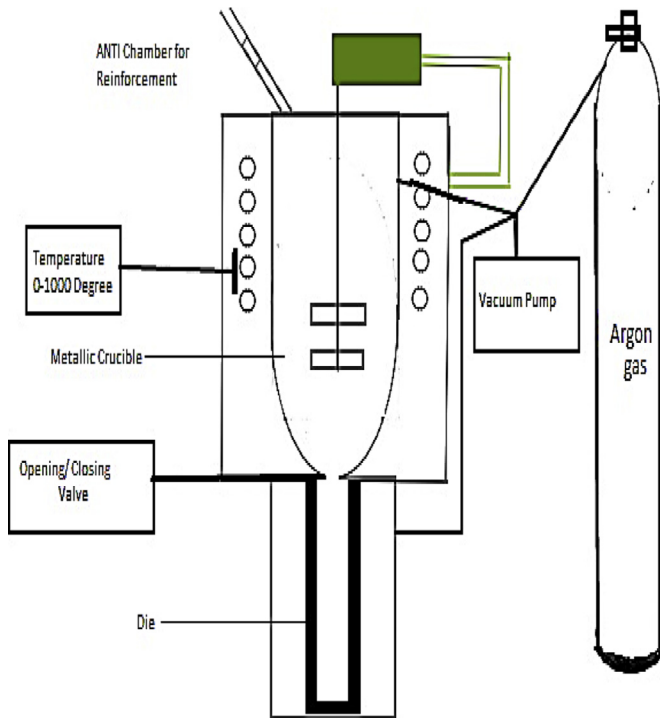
Schematic diagram of vacuum assisted stir casting set-up.
